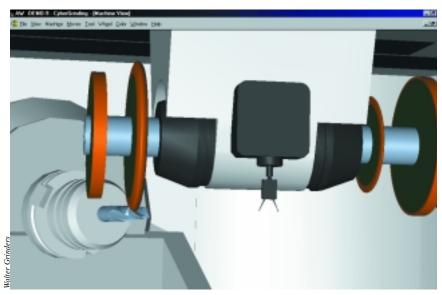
Simulation of the grinding process on a PC reduces setup time on the actual grinding machine.
